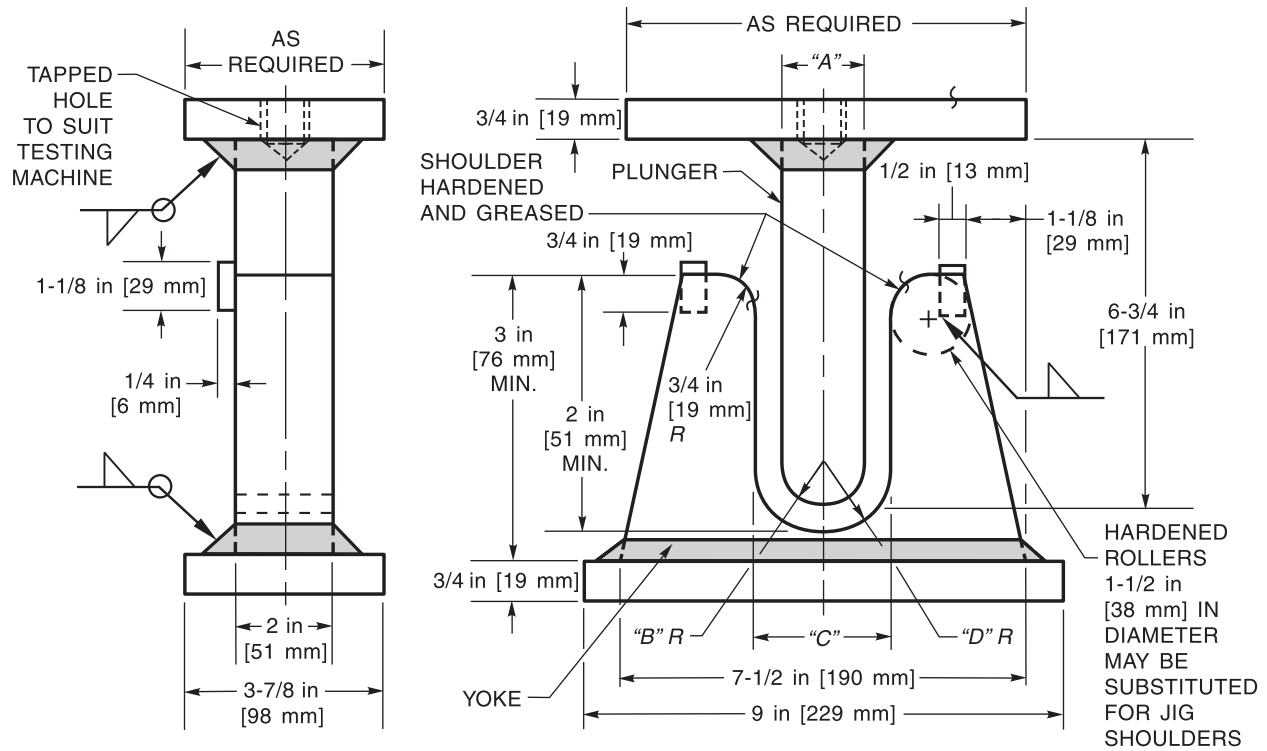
Guided Bend Fixture—Wrap-Around per AWS 2.1
